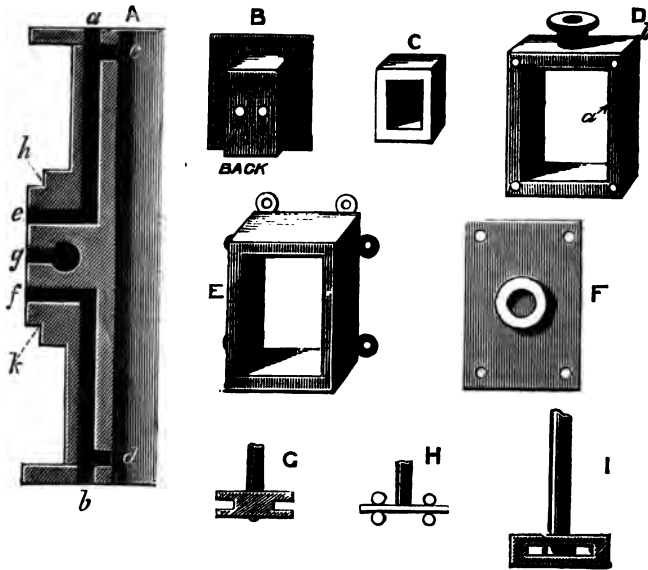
SECTIONAL PARTS OF SLIDE VALVE.
